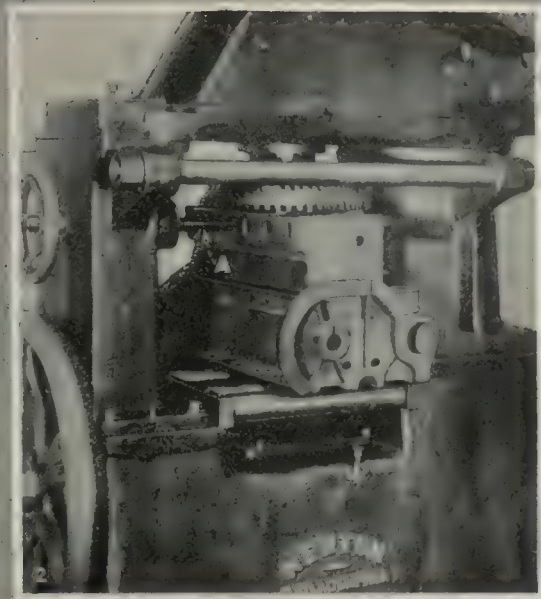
Newton special machine facing and turning the flanges of two oil pans bolted together. The cutter head revolves. Fig. 2—Newton special milling machine located on roller conveyor line. Work is clamped by screw A. The cutter head swings on column at right and the feed is by gear segment and pinion operated by the handwheel.
